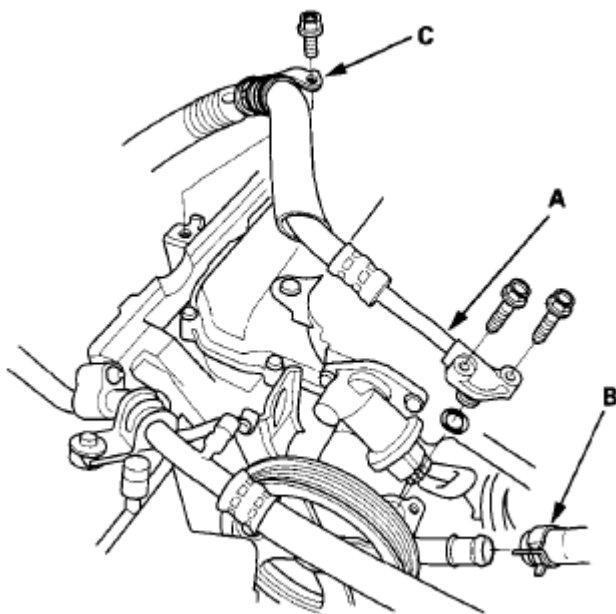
Disconnecting Pump Outlet Hose And Pump Inlet Hose From Power Steering Pump
